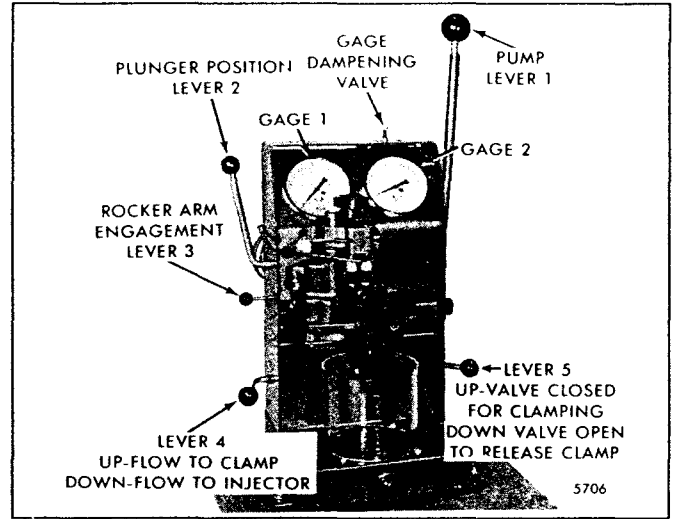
Injector in Position for Testing with Tester J 23010-A
